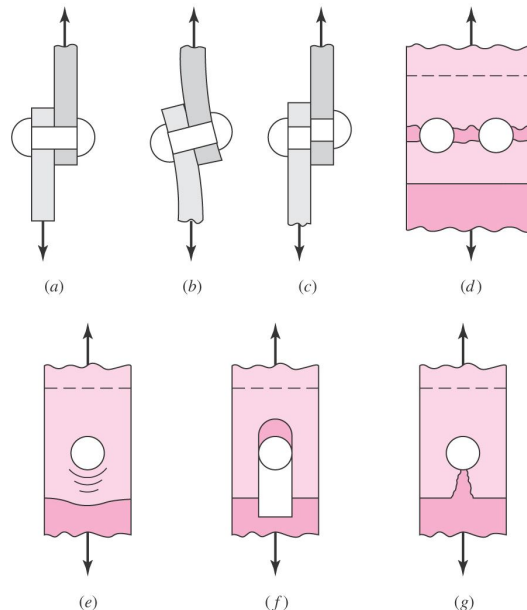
Shigley's Mechanical Engineering Design
